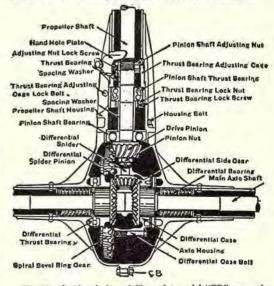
Sectional view of Chevrolet model "FB" rear axle, and differential and drive pinion. To lubricate, use 600W oil.
